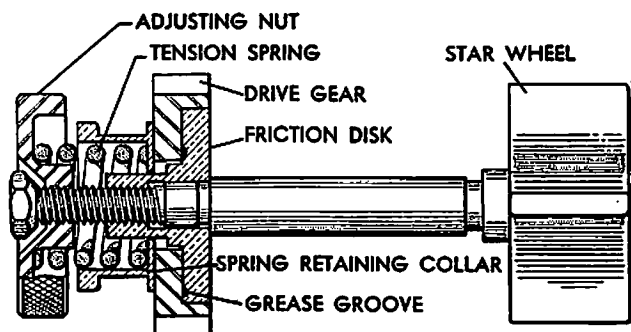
Assembler Star Shaft Assembly. The star wheel turns with the shaft, on which is mounted a friction disk. The drive gear meshes with an intermediate gear and turns the shaft. The drive gear is not fast to the shaft; a tension spring between the adjusting nut and the gear urges the gear against the friction disk. If a line is overset the star wheel and the shaft will stop turning, but the tension spring will allow the gear to continue revolving with the other assembler pinions. When the obstructing matrix is removed from the assembling elevator, the star wheel and the shaft will turn again.
